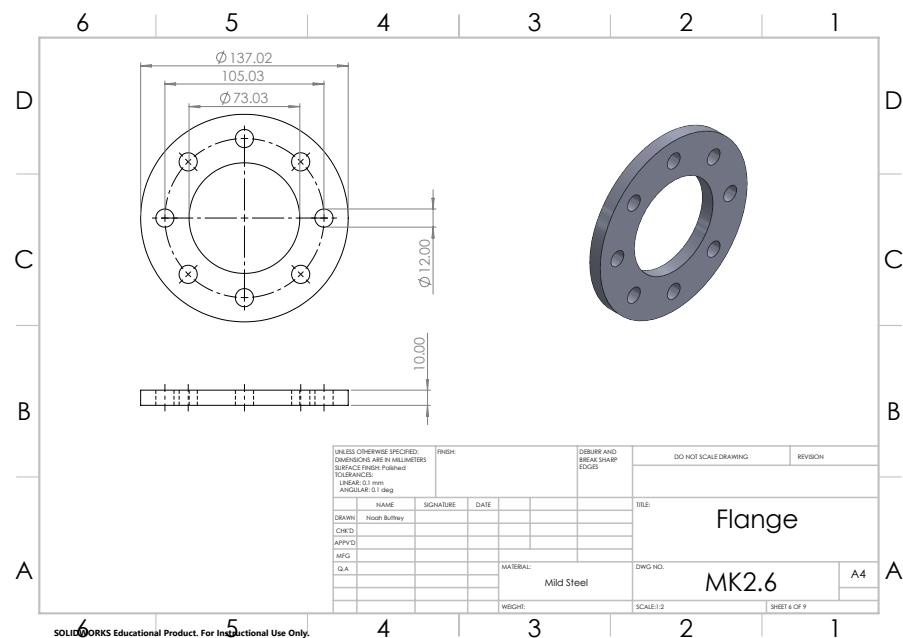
Combustion Chamber Casing End Flanges. Source: Own.
